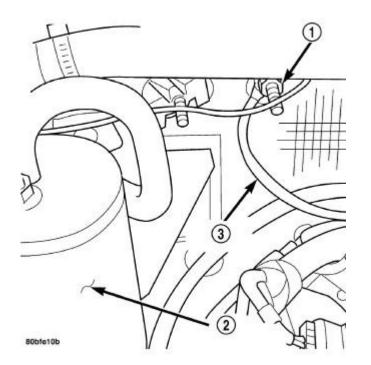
Body Ground Strap-Right Side Removal / Installation Courtesy of CHRYSLER LLC
